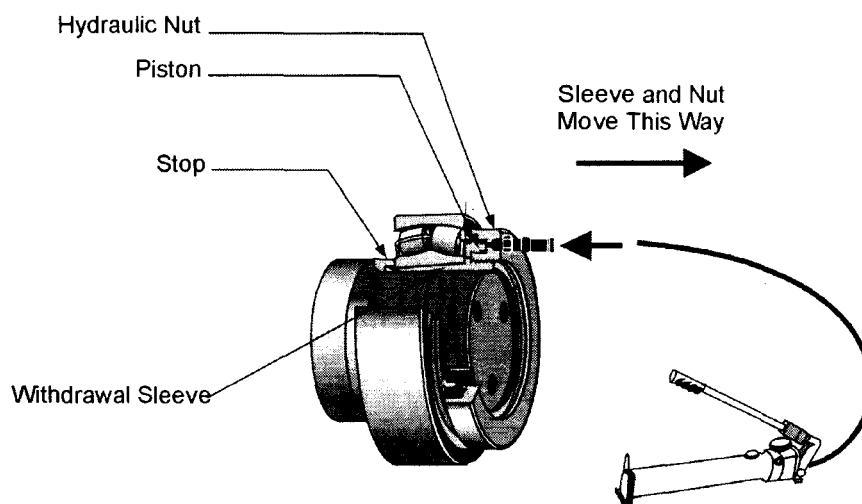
Removal with a hydraulic nut from a withdrawal sleeve.
